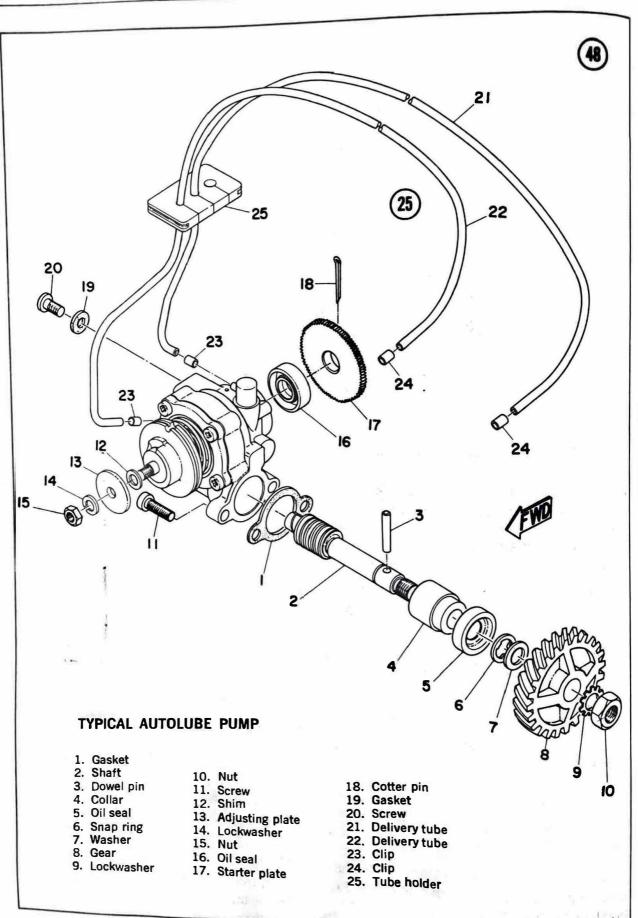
is an exploded view of a typical Autolube pump. The pump is a precision assembly; do not attempt to disassemble it. Whenever the pump is removed, protect it at all times from dust, dirt, and foreign material. After you reinstall the pump, be sure to follow instructions for adjustment and bleeding.
